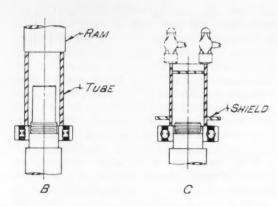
Special bearing cleaner used by aircraft manufacturer to remove rust preventive from new tapered roller bearings before they are installed in wheels
